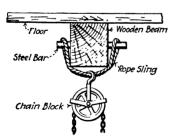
Fastening a chain block to a beam with a steel bar and a rope sling.
